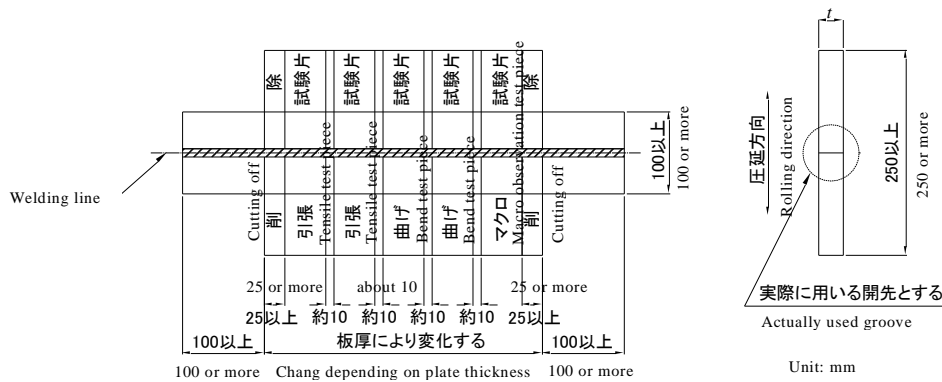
Specimen Used for Welding Tests for Complete Penetration Groove Welding
